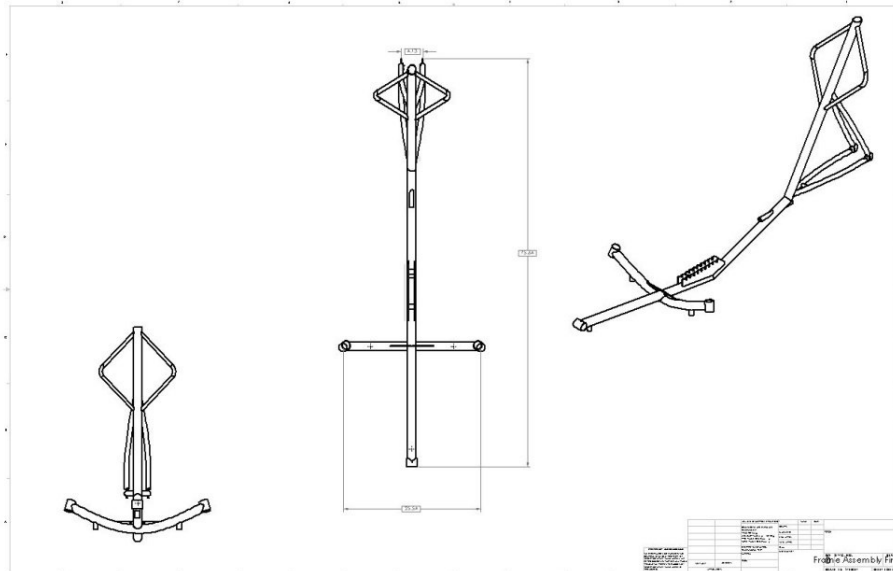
Shows the Engineering Assembly of the 2008 HPV Frame
